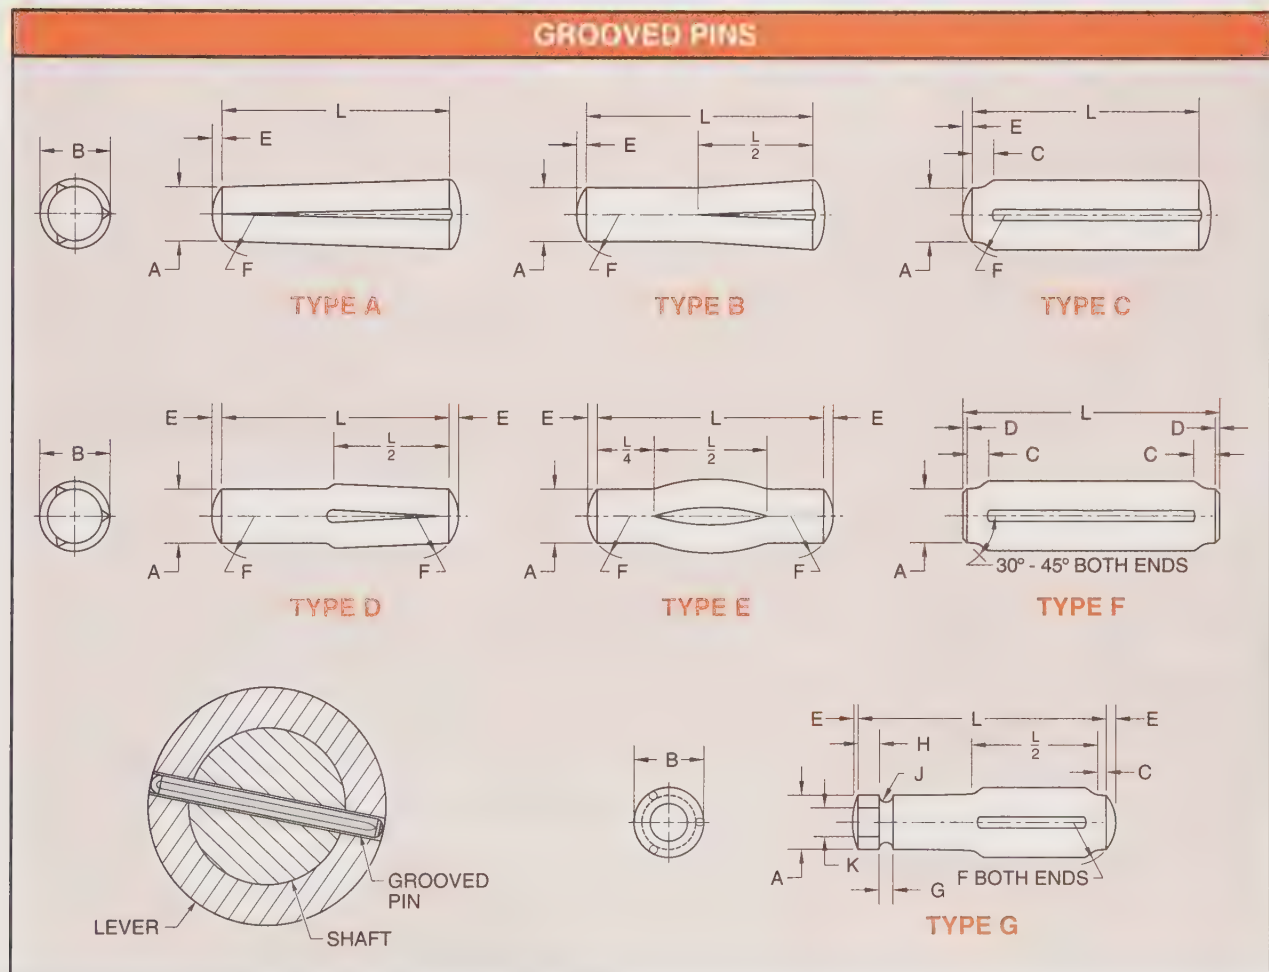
Grooved pins are fabricated from bar stock and have three parallel, equally spaced grooves.
